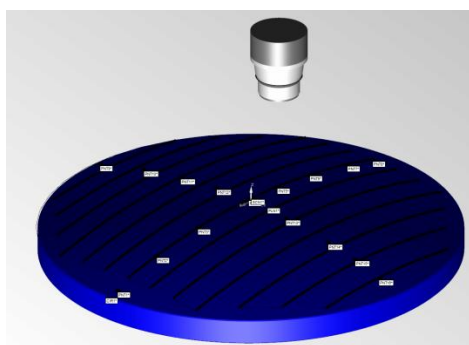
Measurement setup of the Ø380 mm Optical Tube Assembly (OTA) lens in the Isara 400 3D CMM
